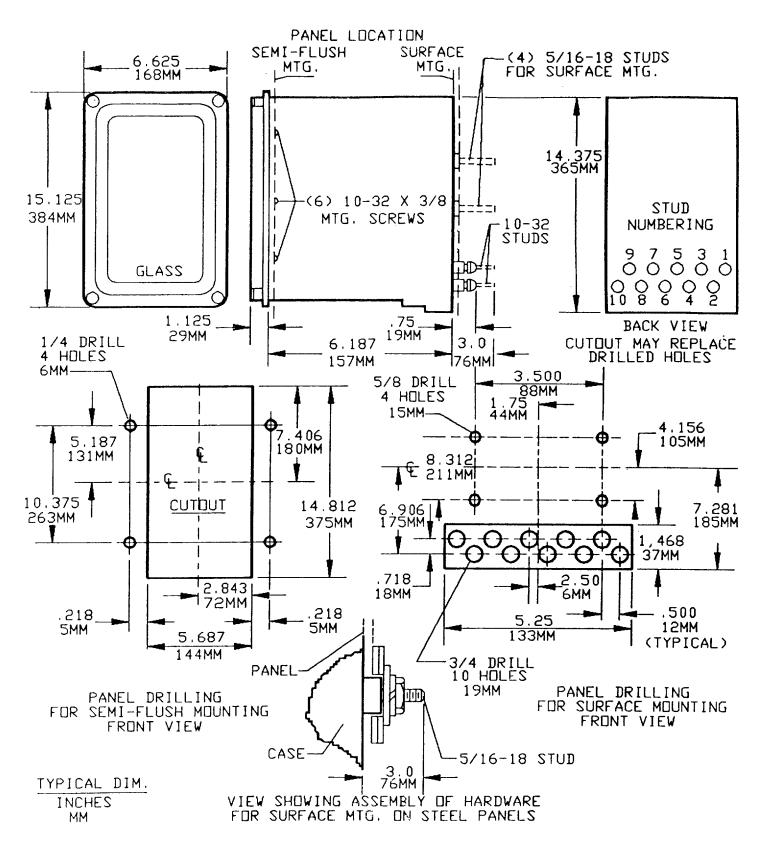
(K-6209273-5) Outline and Panel Drilling Dimensions for Size M1 Case
